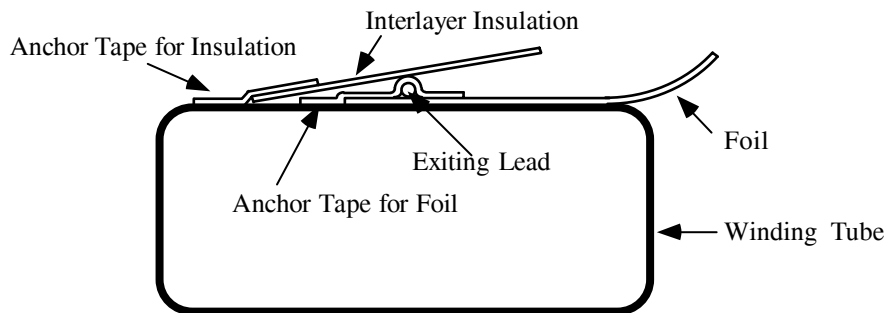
Attaching the Insulation to the Winding Tube.
